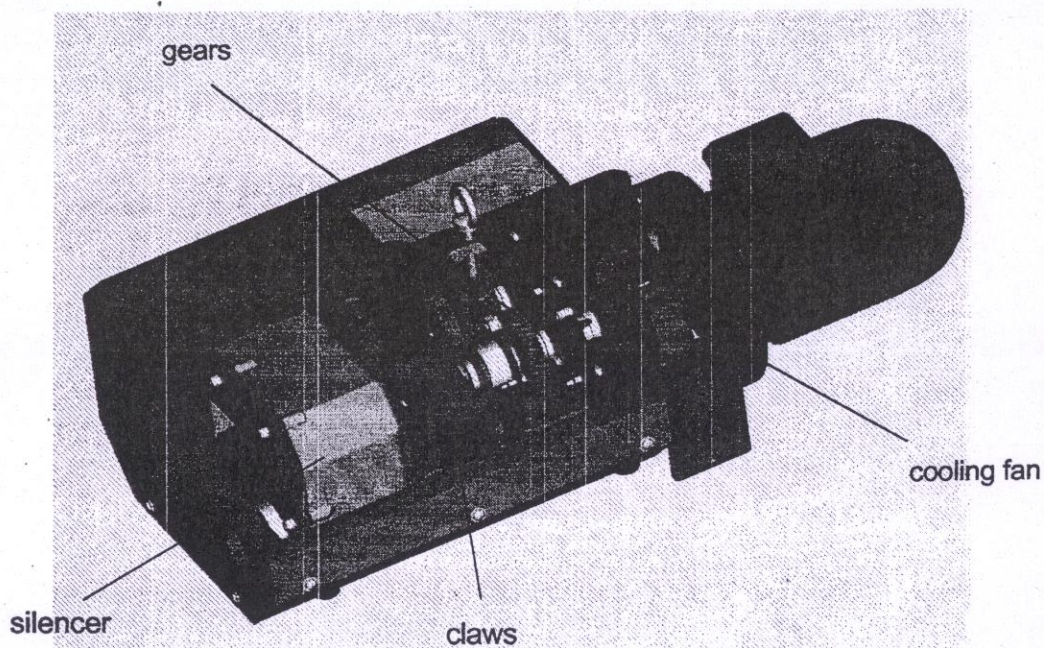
Cut-away view of a Busch Mink MM series rotary claw pump
